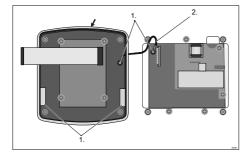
With control panel installation: Fit the profile seal onto the top part of the controller housing
